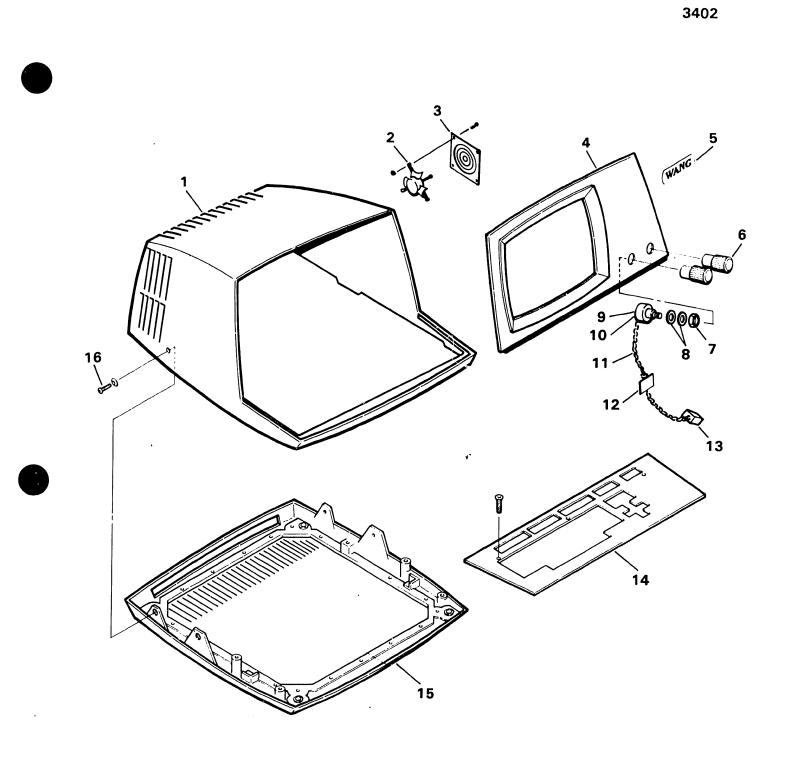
EXTERNAL COVERS ASSEMBLY (ASSEMBLY PART NO. 279-4128)
